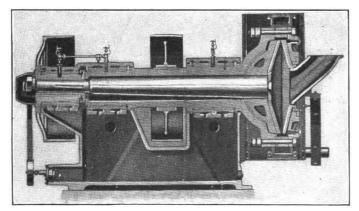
36" and 48" Symons disc crusher (sectional view).43
